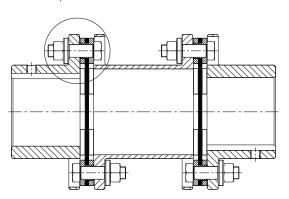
Assembly of laminae sets, RADEX®-N size 80 - 135
